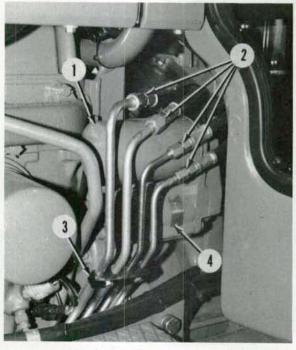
Auxiliary hydraulic pump is mounted on left side of engine and driven by a gear on rear end of engine camshaft.
